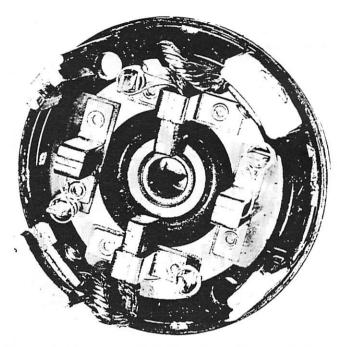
Commutator End Plate Assembly with Springs and Brushes in Place
